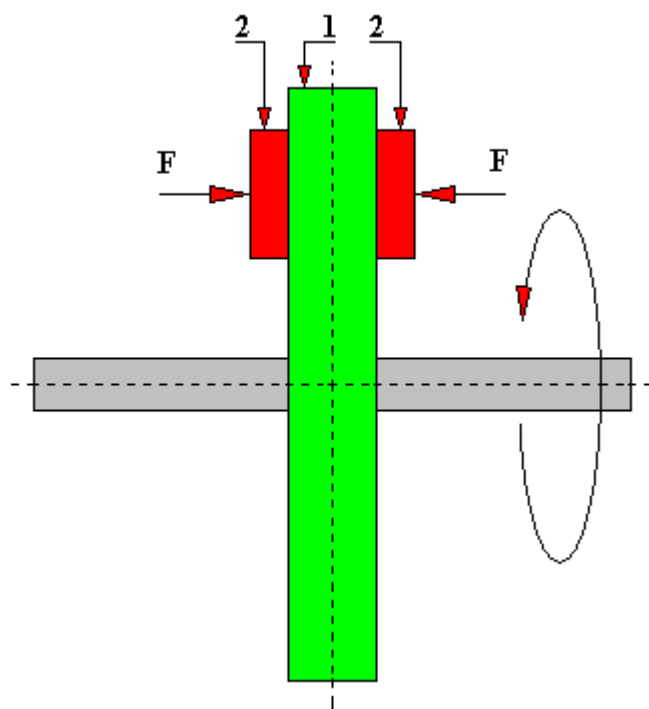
A diagram of the mating of the friction contact: brake disc - brake shoes; version with one pair of brake shoes
